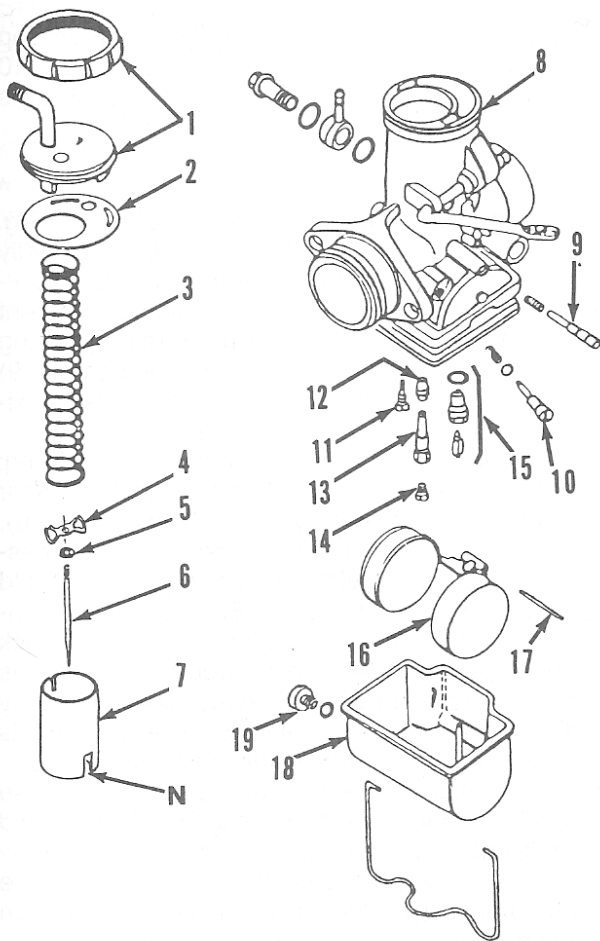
Exploded view of Keihin PW26 carburetor used on KLT200-A1 and KLT200-A2 models and KLT200-A3 models prior to frame number 522925. Refer to Fig. K7-6 for parts identification.
